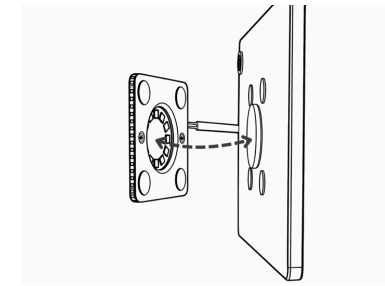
Connect Charging cable to the Tablet and dock it to the mount (see sections 6.2.6 - 6.2.8)
